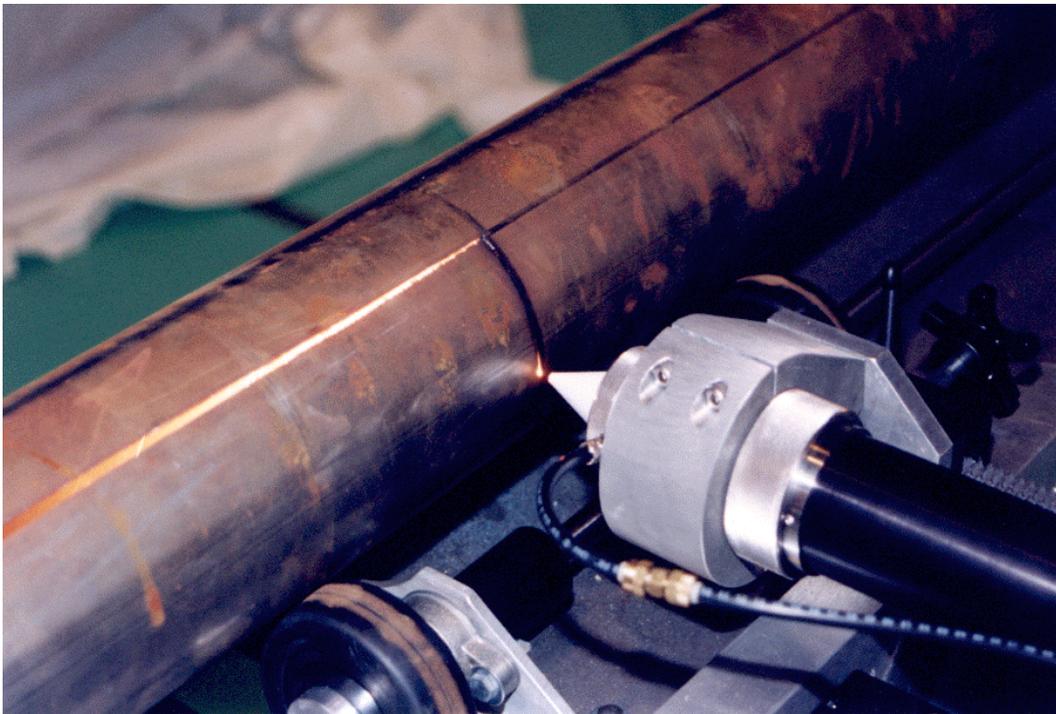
Close-Up of the Laser Cutting Process, Showing the Cutting Operation and the Laser Focusing Head
